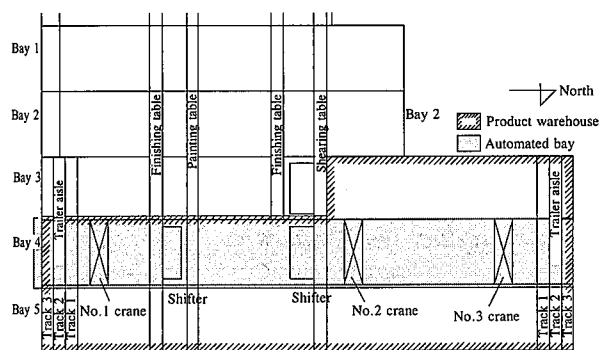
Equipment outline of plate warehouse at Oita plate mill
